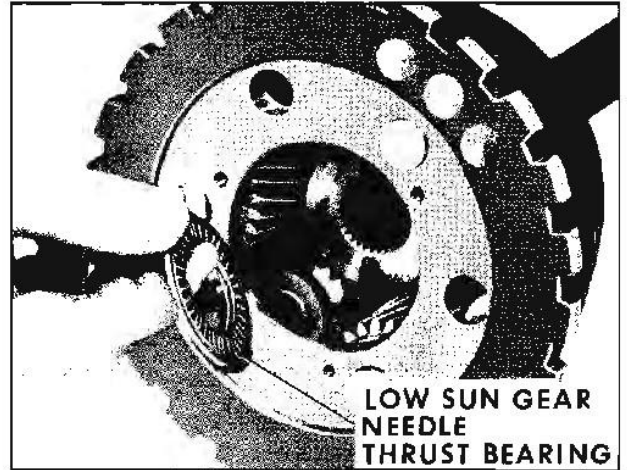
B-87 Removing Low Sun Gear Needle Thrust Bearing
